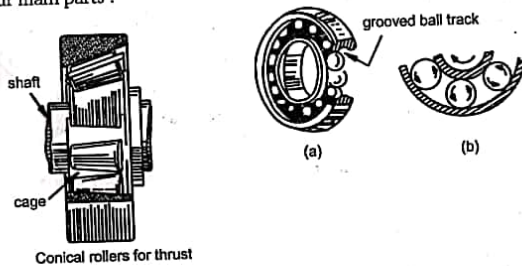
(ii) (b) : Section of a ball bearing showing the relative motion of the parts in a ball bearing.
